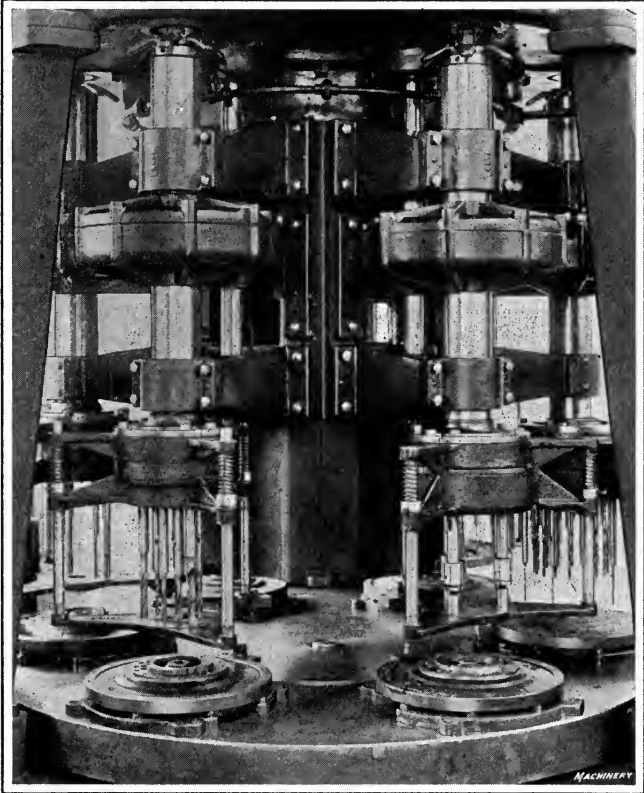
Drill Heads equipped with Tools for Drilling and Reaming Operations
